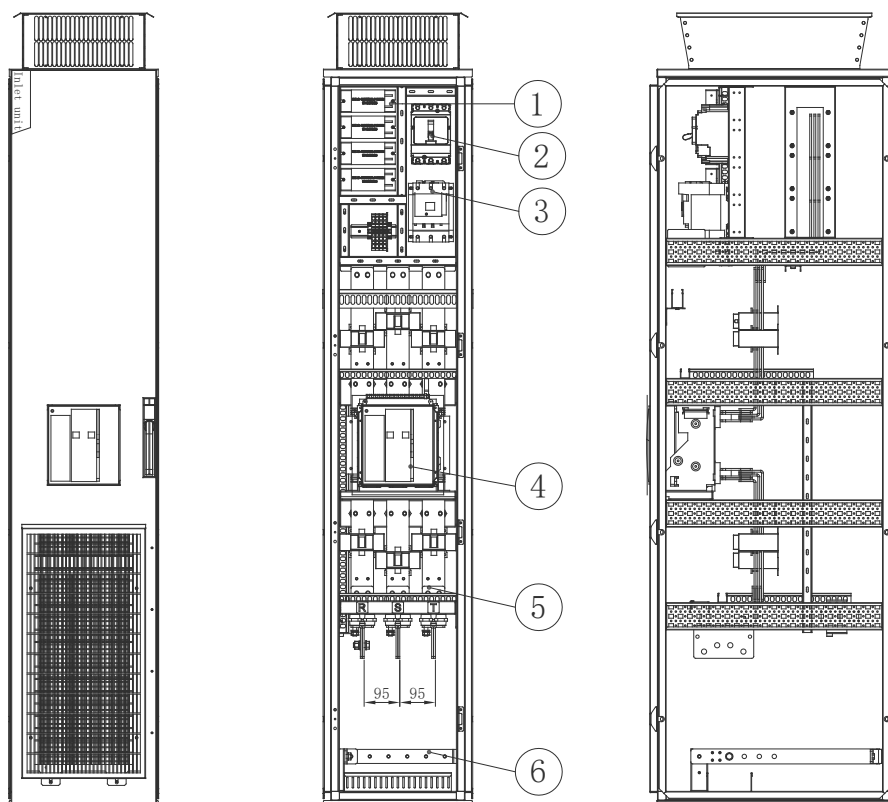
Frame Breaker Inlet Cabinet Unit Structural Layout
